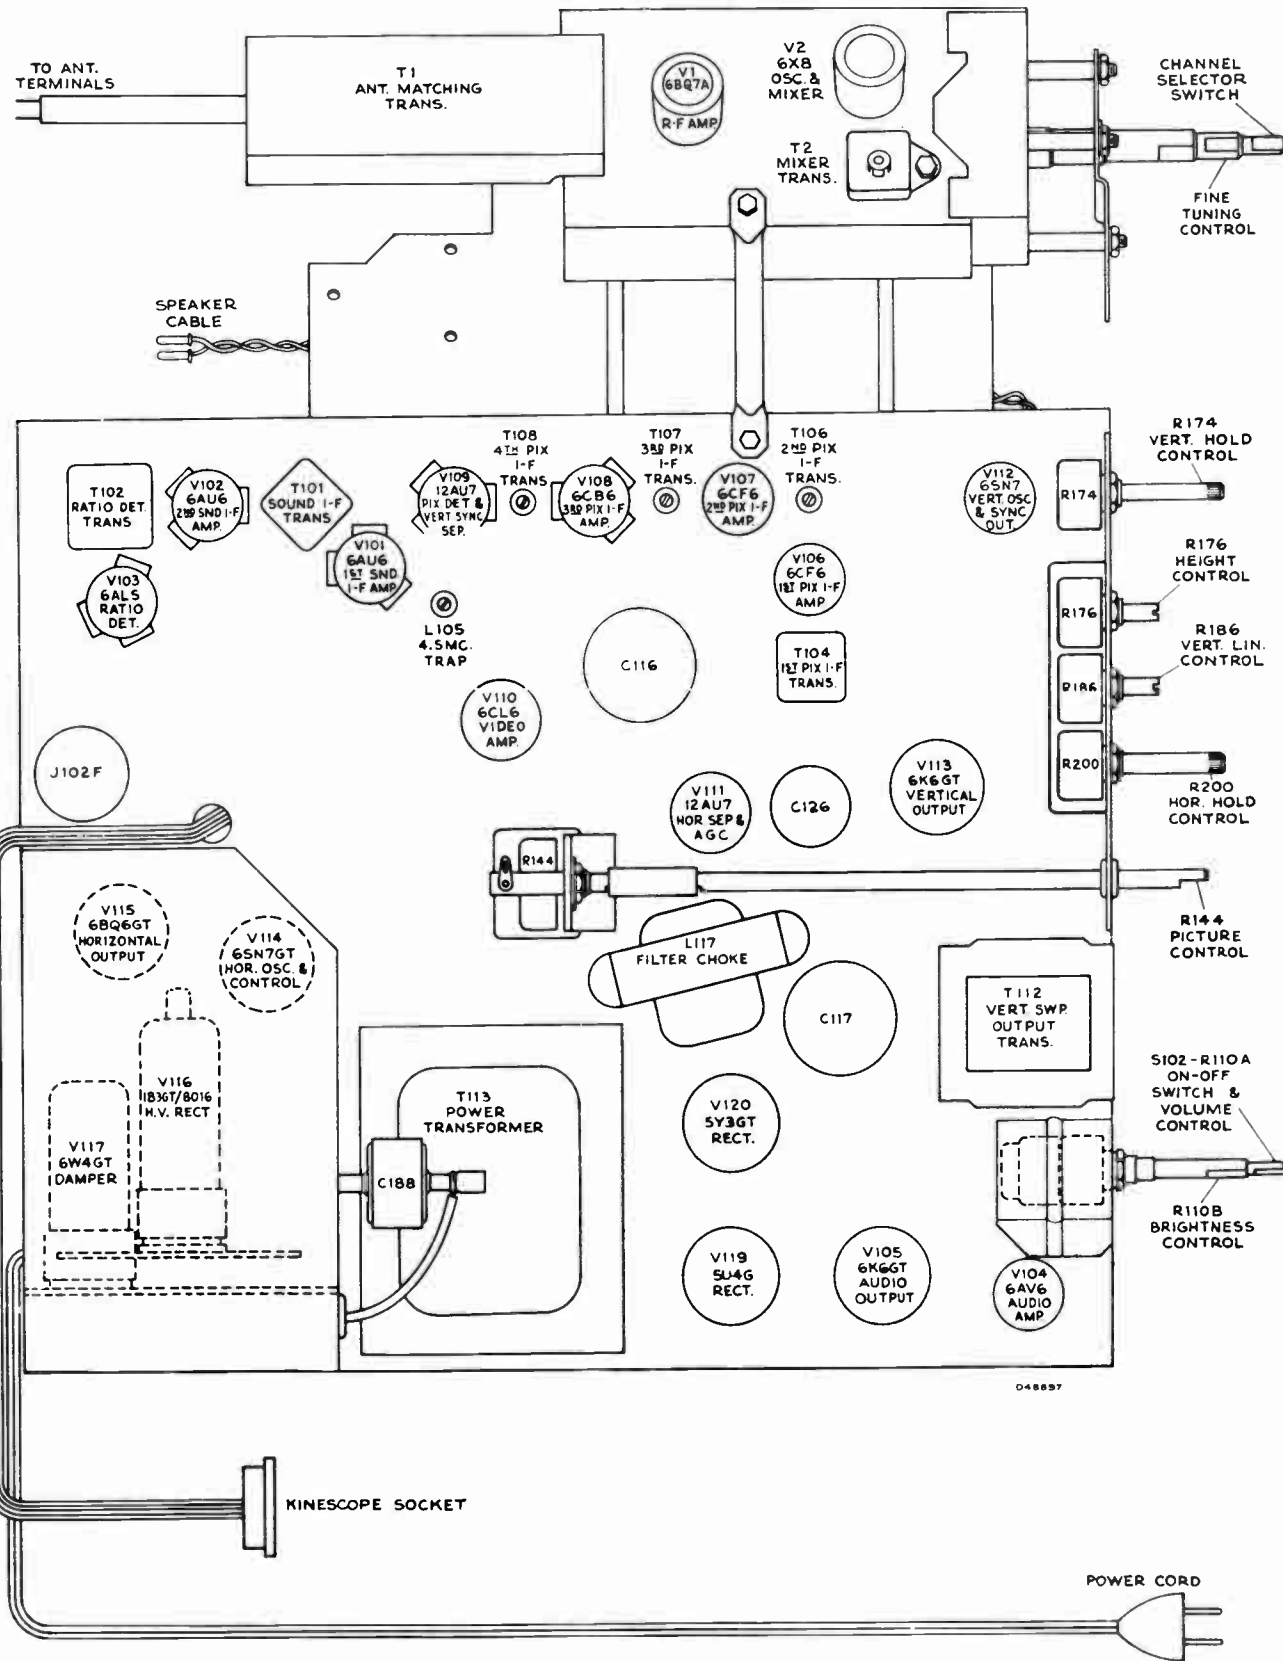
Chassis Top View (shown with KRK29 Tuner)
